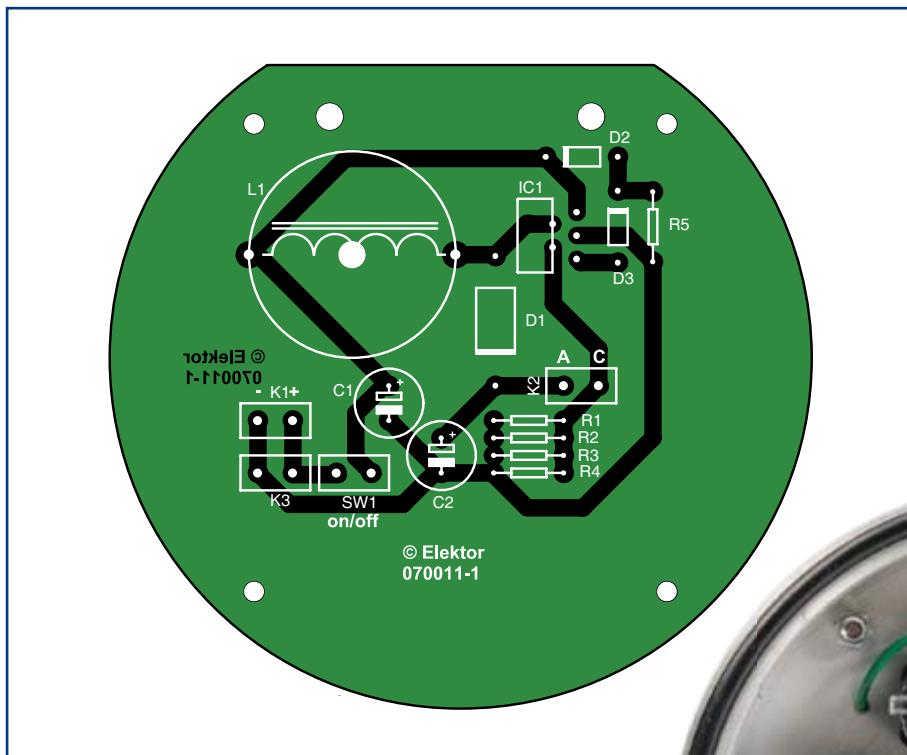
The shape of the board has been made to give a good fit in the torch housing.
